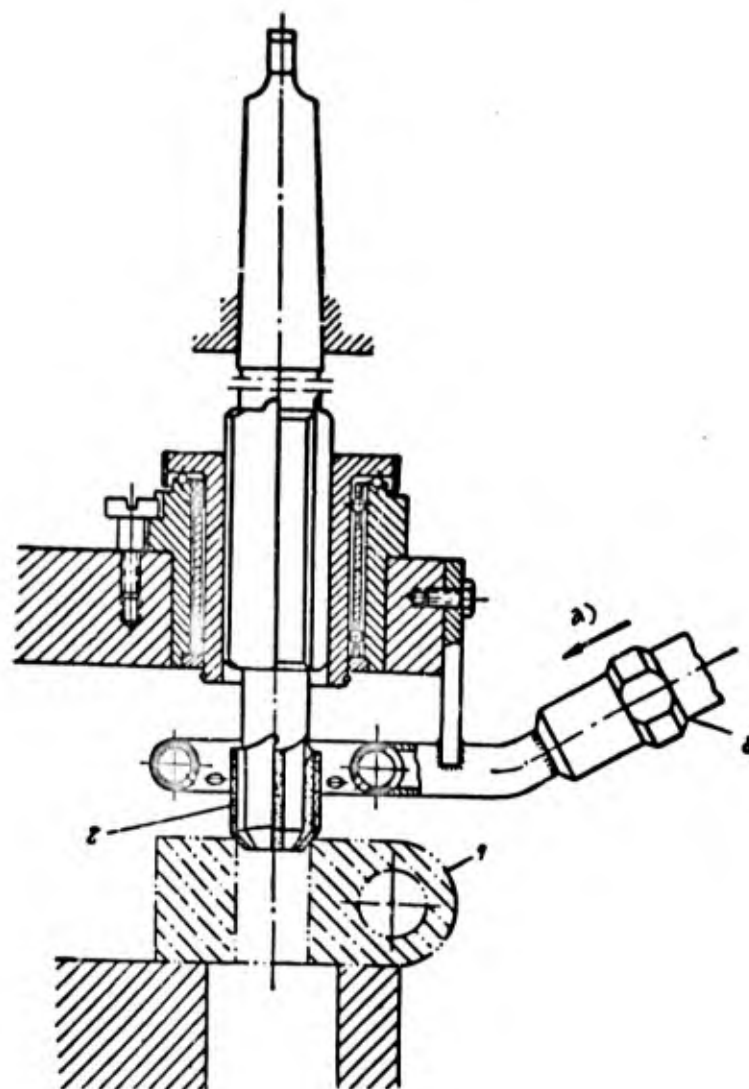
Flute Reaming Setup With Coolant Introduced Through Special Rings
